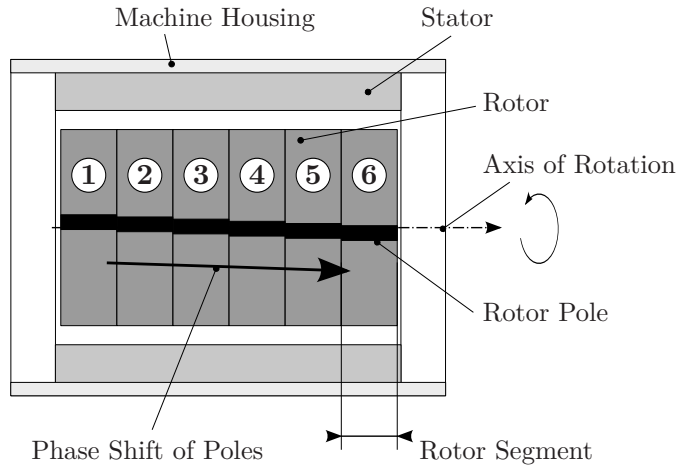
Side view of electric machine including rotor with stepwise twisted, stator and housing.
